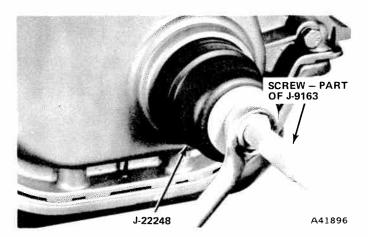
A-26 Timing Chain Cover Oil Seal Installation
